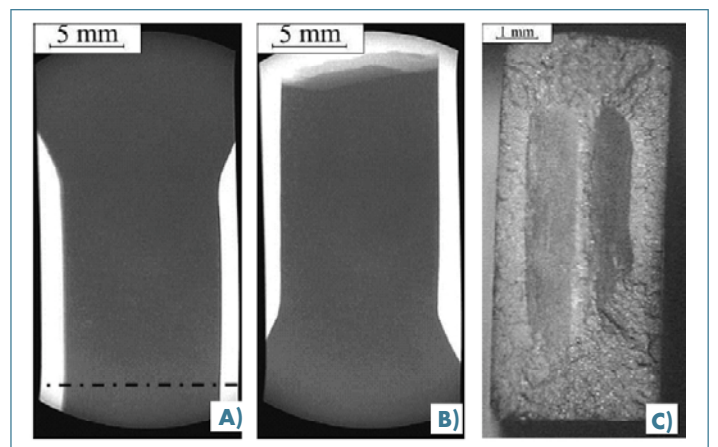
X-ray images of a tensile bar (a) before and (b) after testing; (c) fracture surface. The line in (a) represents the fracture path in the specimen. Defects were not detectable by X-ray inspection.
